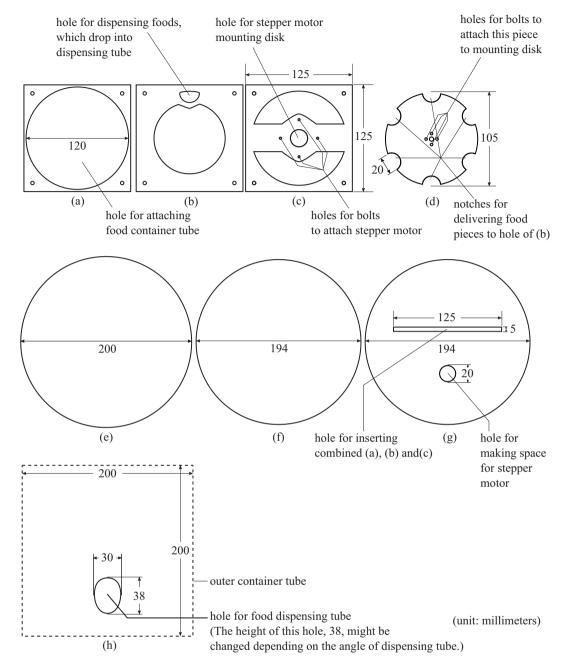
Drawing for laser cutting; (f) and (g) are 6 mm thick and other pieces are 3 mm thick.
